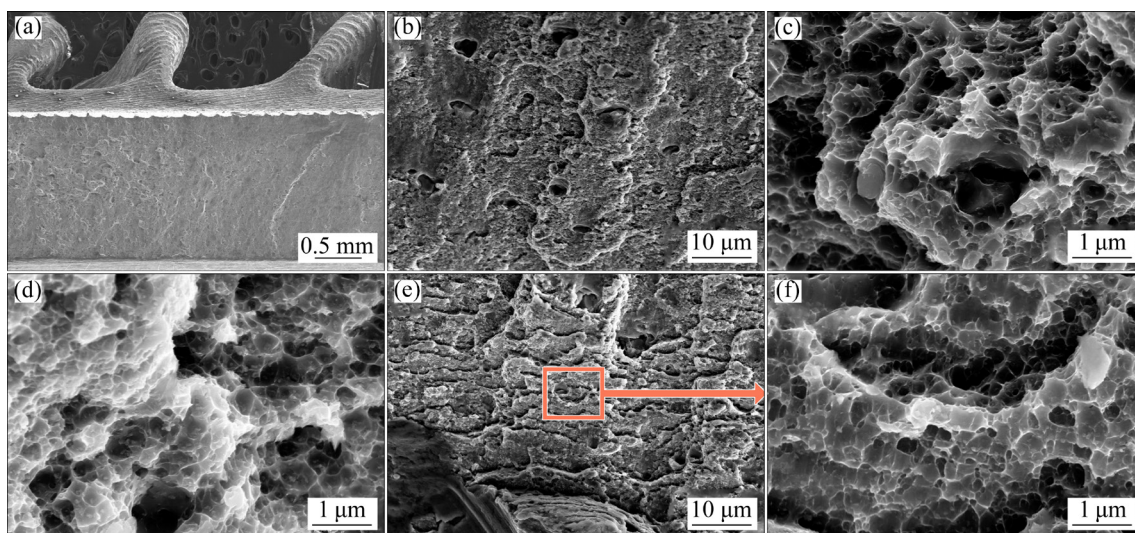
Fracture surface morphologies of UVeFSW joint obtained at welding speed of 120 mm/min: (a) Low magnification morphology of fracture surface; (b–d) High magnification morphologies of fracture surface in middle of weld; (e, f) High magnification morphologies of fracture surface in bottom of weld
